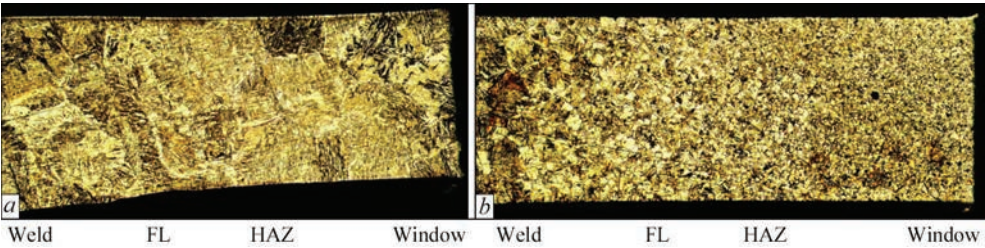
Macrostructure ($\times 25$) of welded joints of VT-20 titanium alloy: a — TIG welding; b — A-TIG welding, FL — fusion line, HAZ — heat-affected zone
